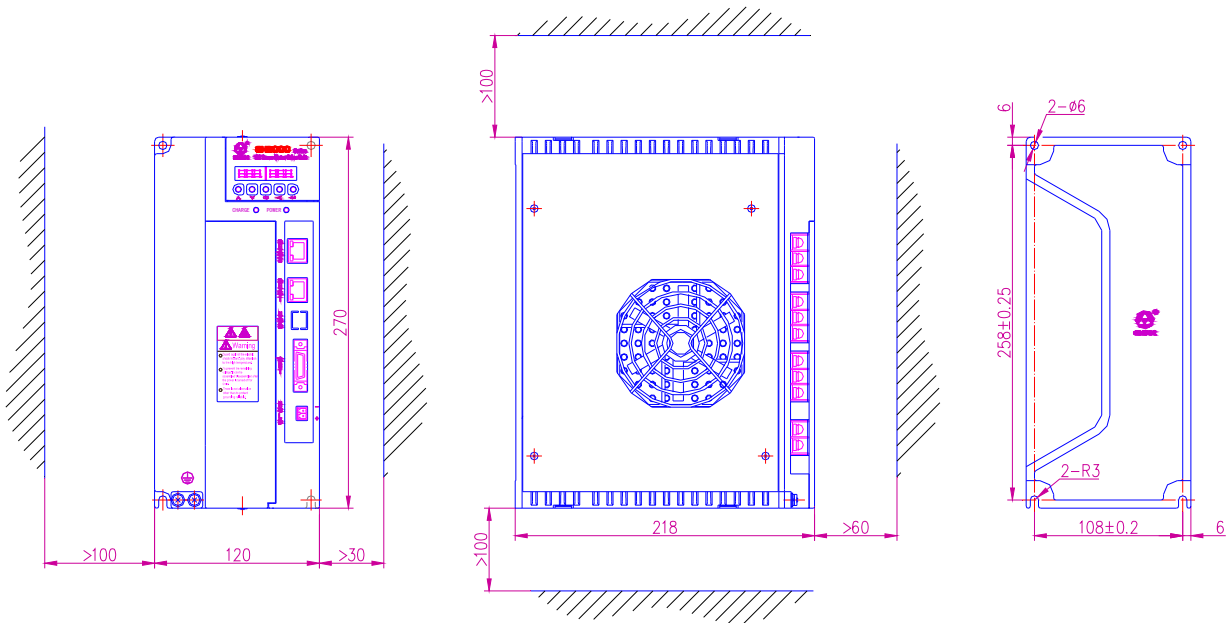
GH2075T, GH3050T installation dimension (Unit: mm)
